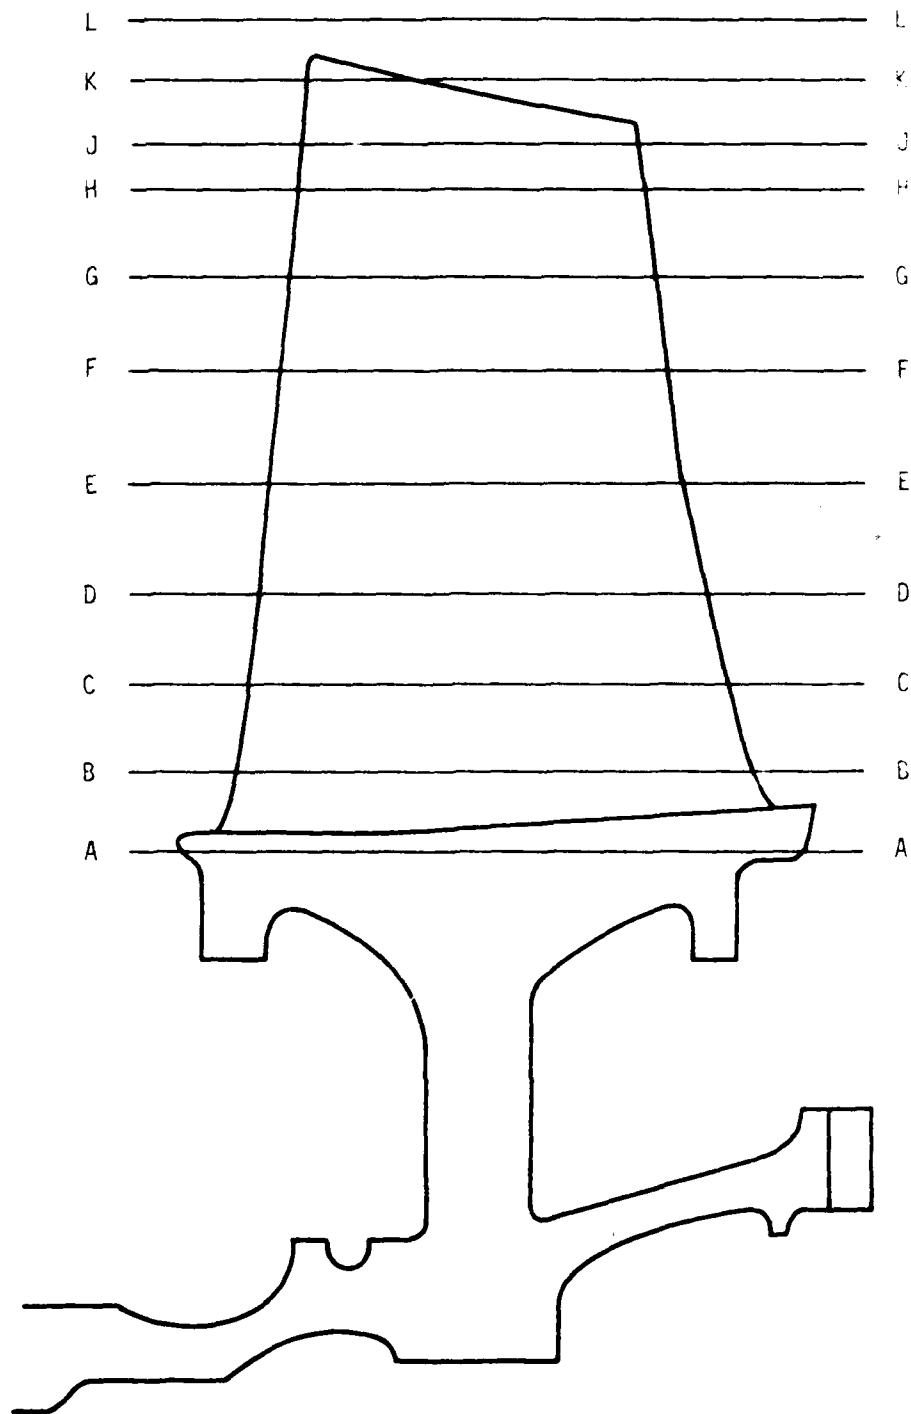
Stage 1 Blade With Sections as Defined on Engineering Drawing.
